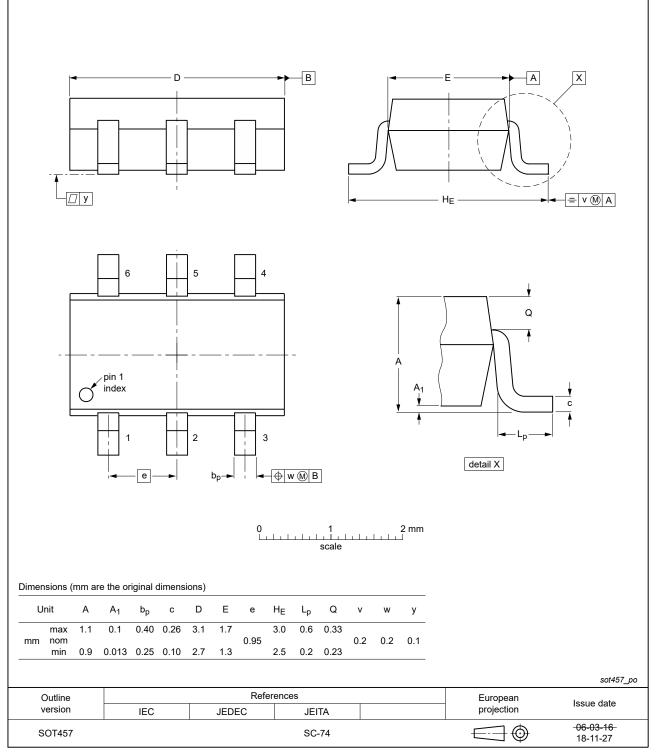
Package outline SOT457 (SC-74; TSOP6)
